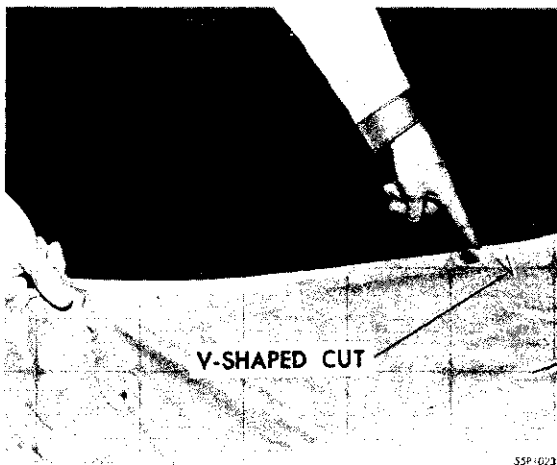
Marking Headlining with Small V-Shaped Cuts
